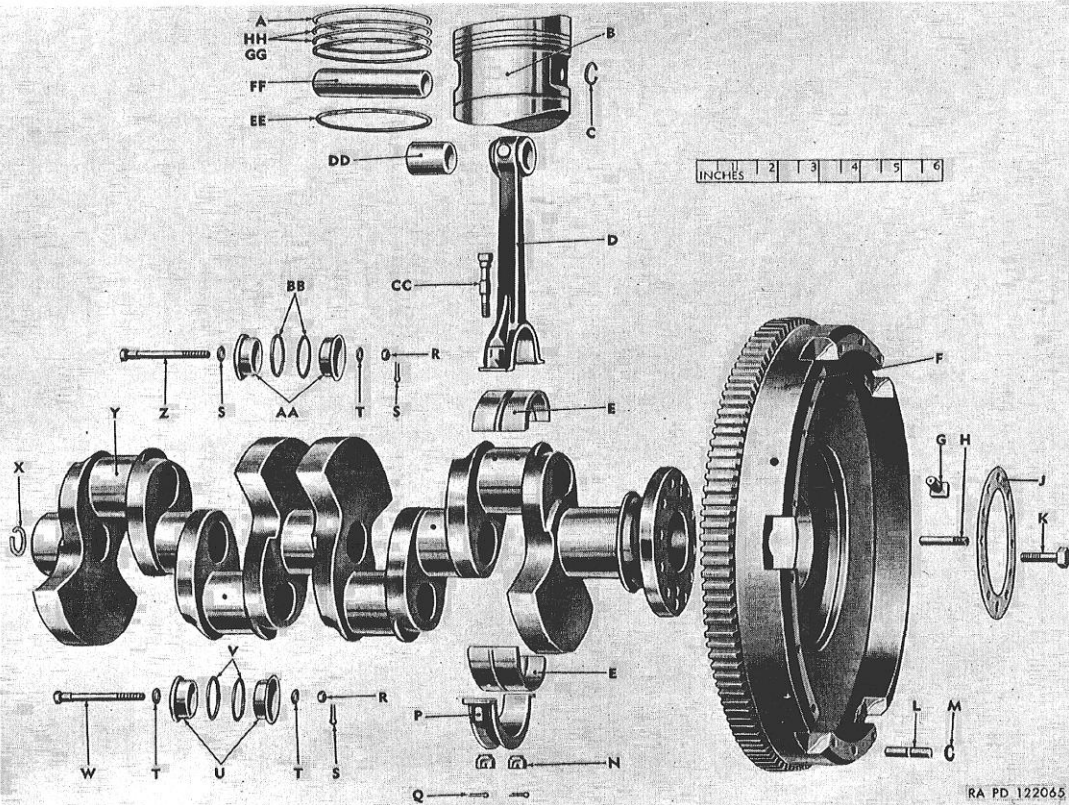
Engine crankshaft flywheel and piston, exploded view.
